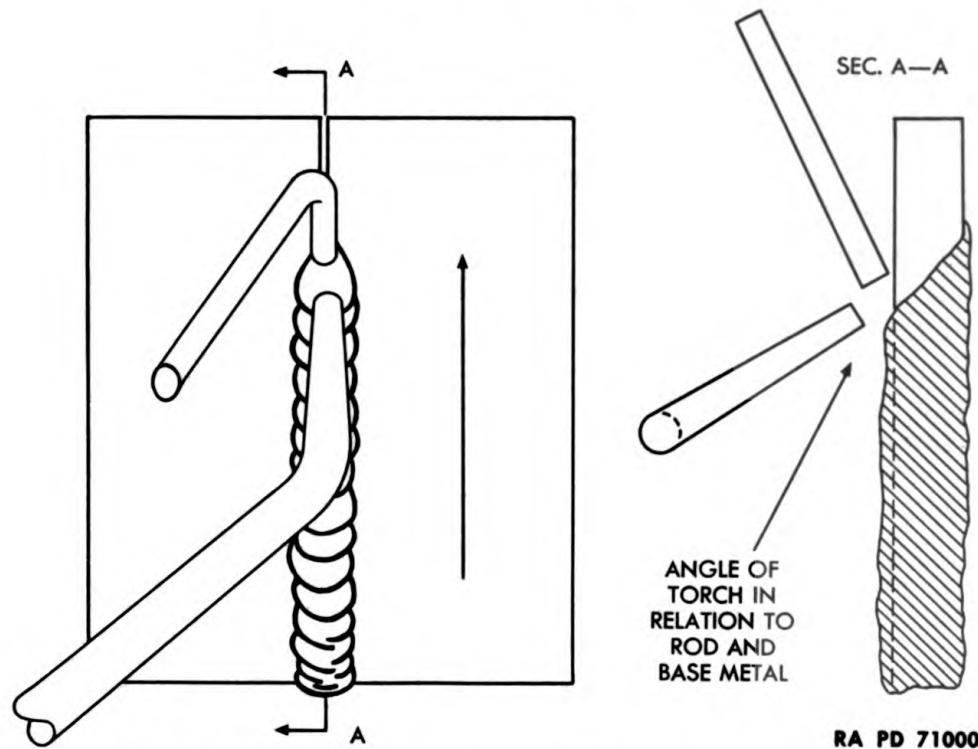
Welding a Butt Joint in the Vertical Position
